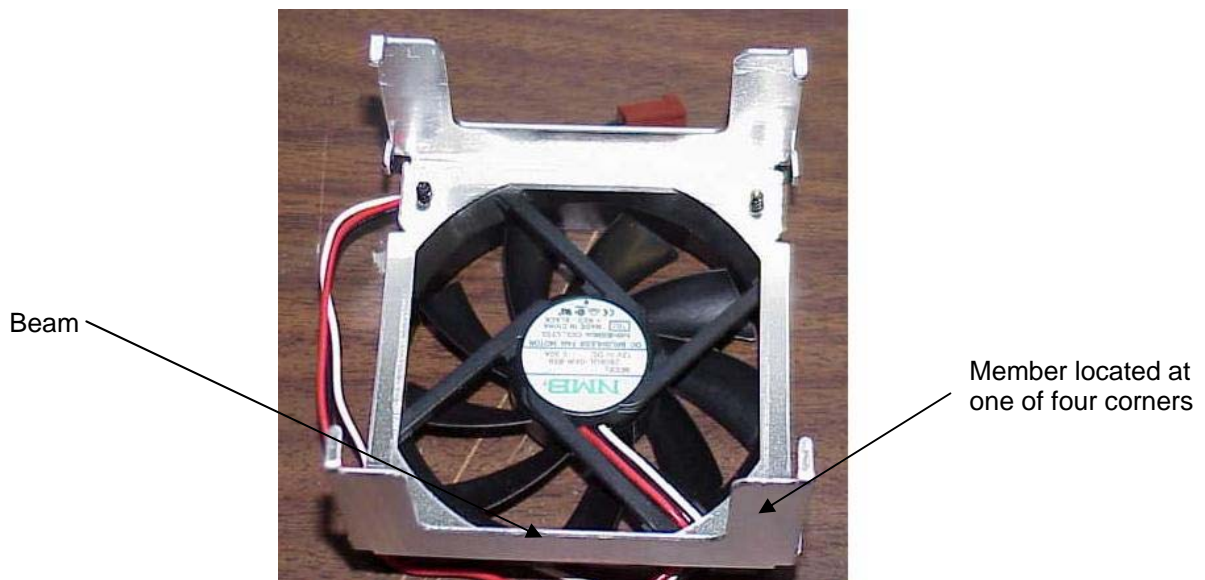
Shroud and Fan Assembly for '329 Heat Sink
